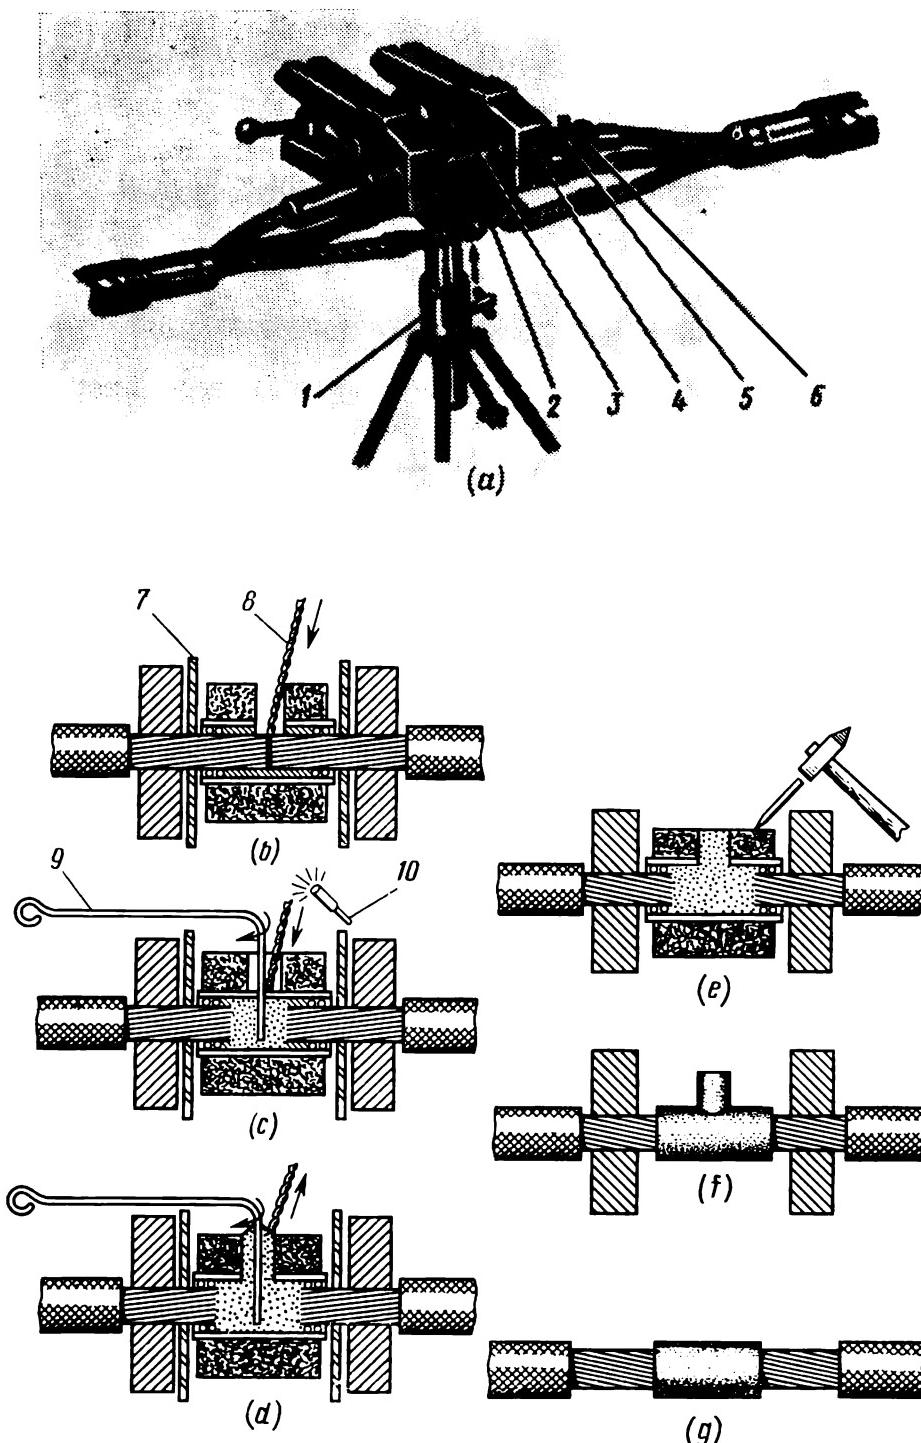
Jointing aluminium cable conductors by thermit welding
